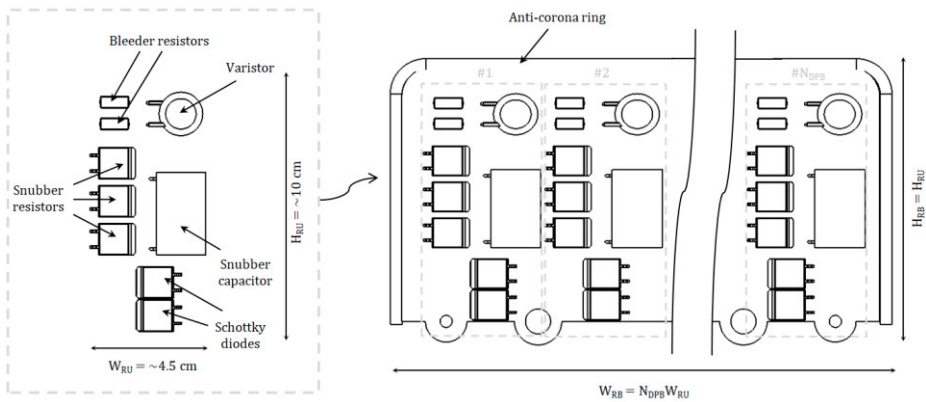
Printed circuit board with diodes and associated components. Each PCB is equipped with its own anti-corona ring.
